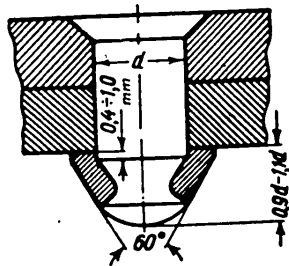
Dimensions of the Clenched Head of High Shear Strength Rivets
